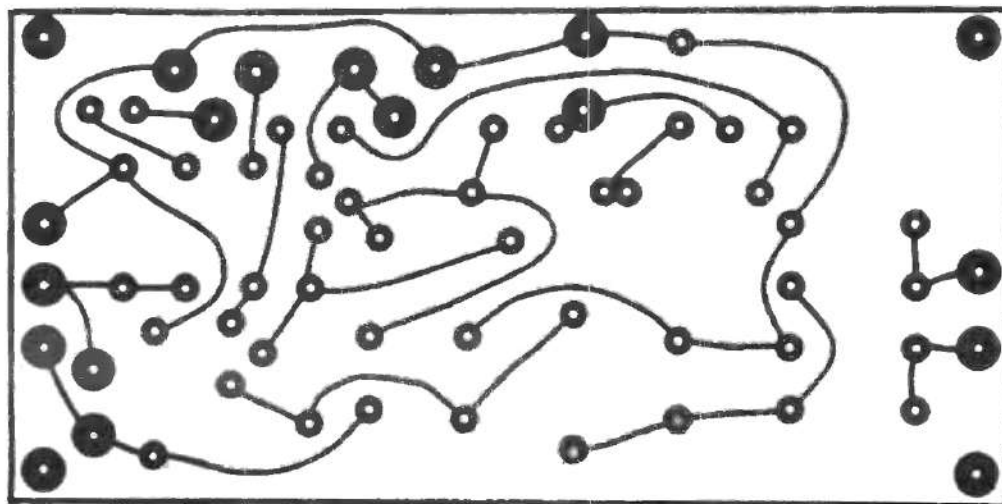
Actual-size foil pattern can be used to make your own circuit board.
